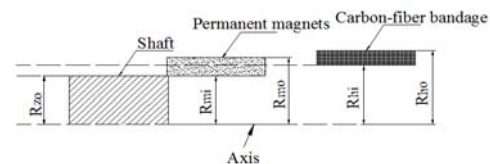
The Dimensions of the Surface-mounted High Speed PM Rotor
